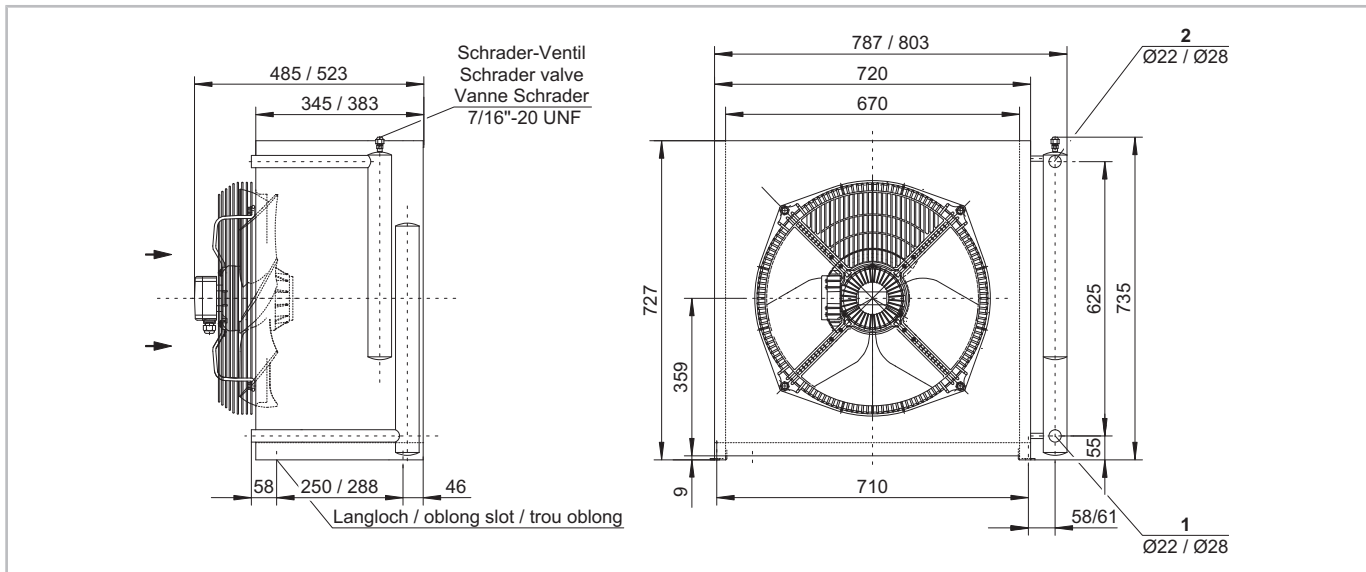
Dimensional drawings oil coolers OL200, OL300
